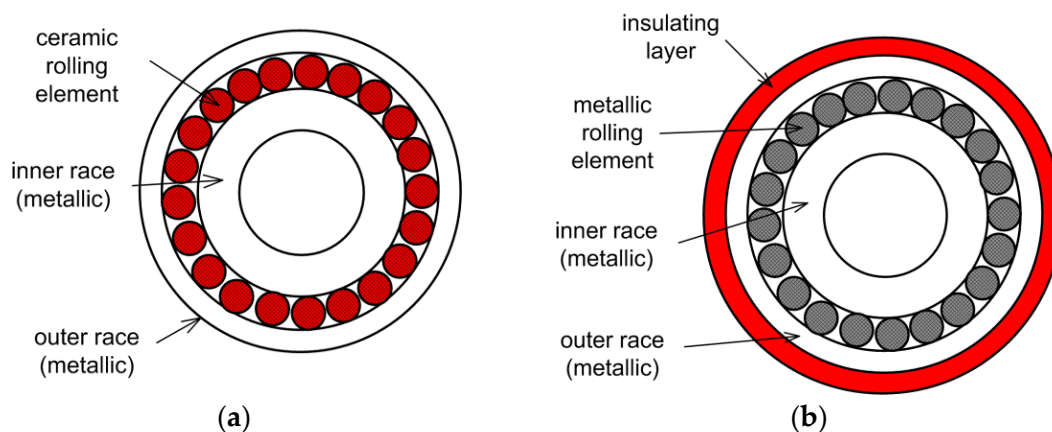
Bearing cross-section: (a) hybrid; (b) insulated.
